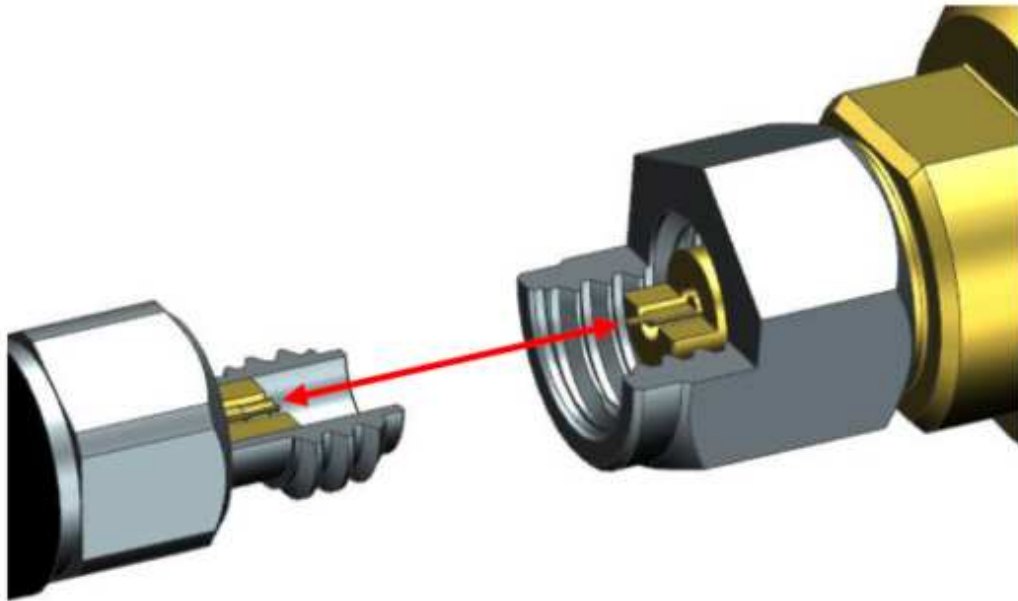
Extra care must be applied on types of connector that have a protruding male pin that engages with the female socket before the outer threaded conductor has started to mesh, to avoid damage to either or both inner conductors,
